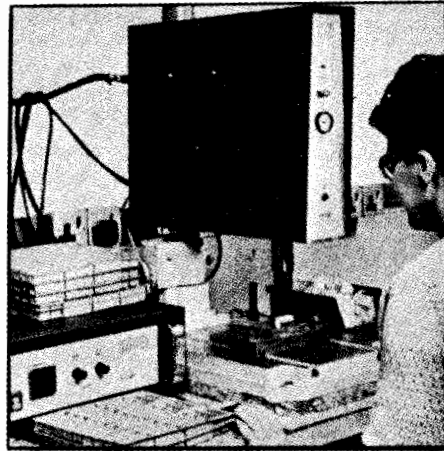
Welding and staking indicator lights (Kerry).
